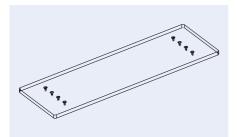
Microscopy slide through-hole platform – version with eight fluidic interfaces
